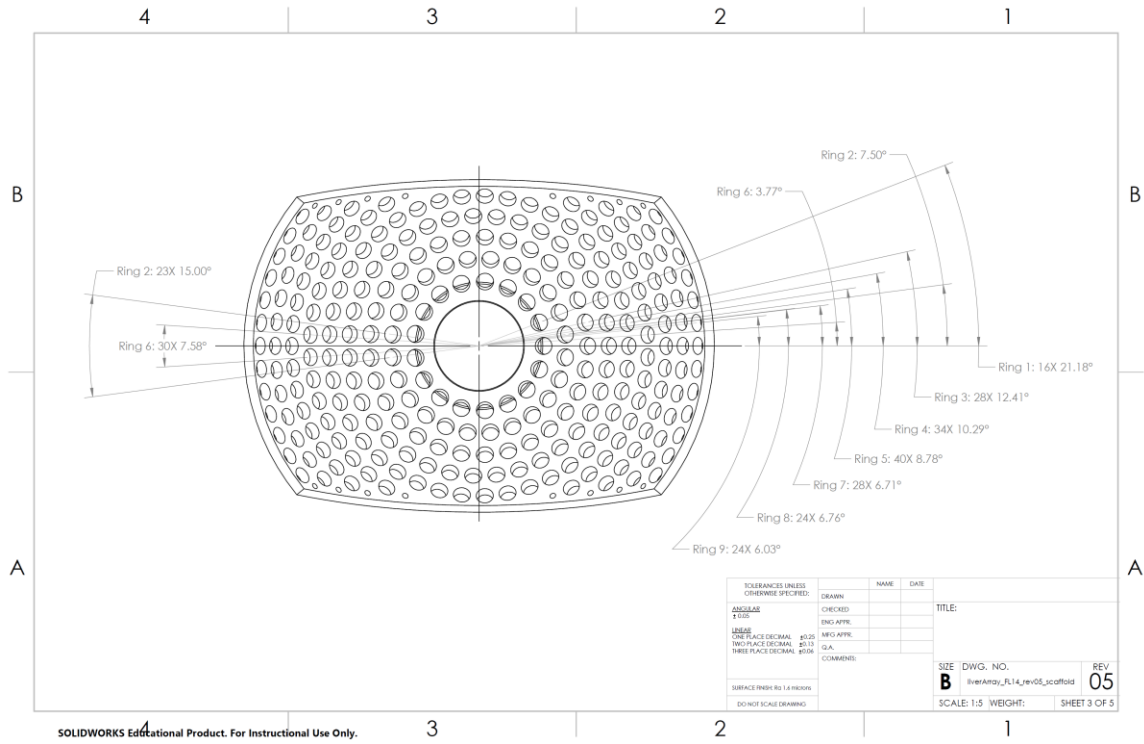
3. Technical drawing of liver array scaffold. Sheet 3 of 5.
